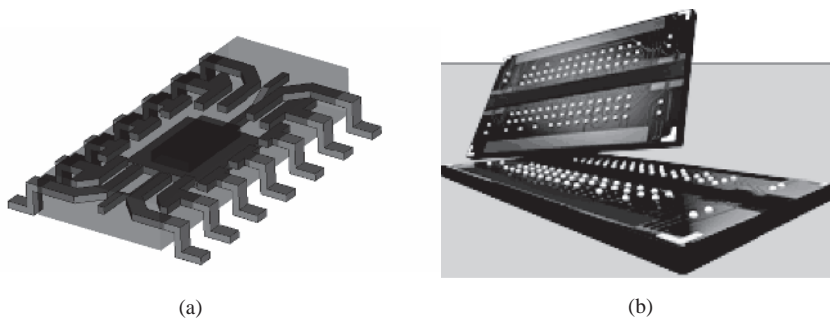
IC package: (a) lead frame directly soldered on the PCB; (b) *Pin Grid Arrays* (PGAs) or *Ball Grid Arrays* (BGAs) stick out of the bottom of the package (as in the flip chip attachment) to a socket or to the board
